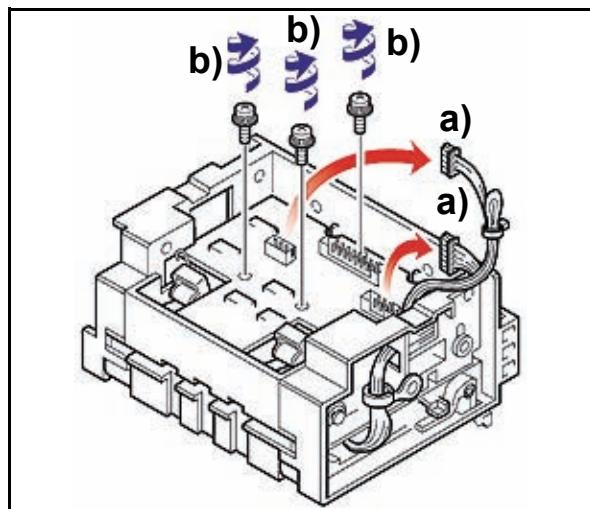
WBA Acceptor's Lower Sensor Board Removal
